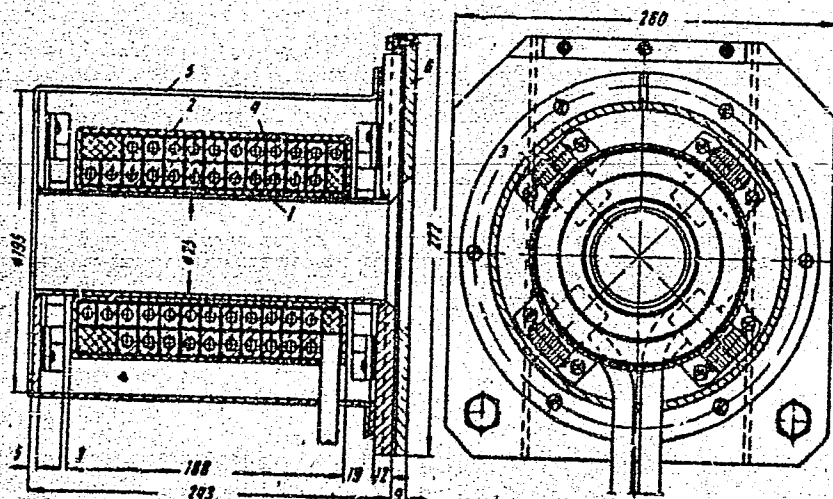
Inductor for hot rolling of tubes in KhPT-75 tube mill
